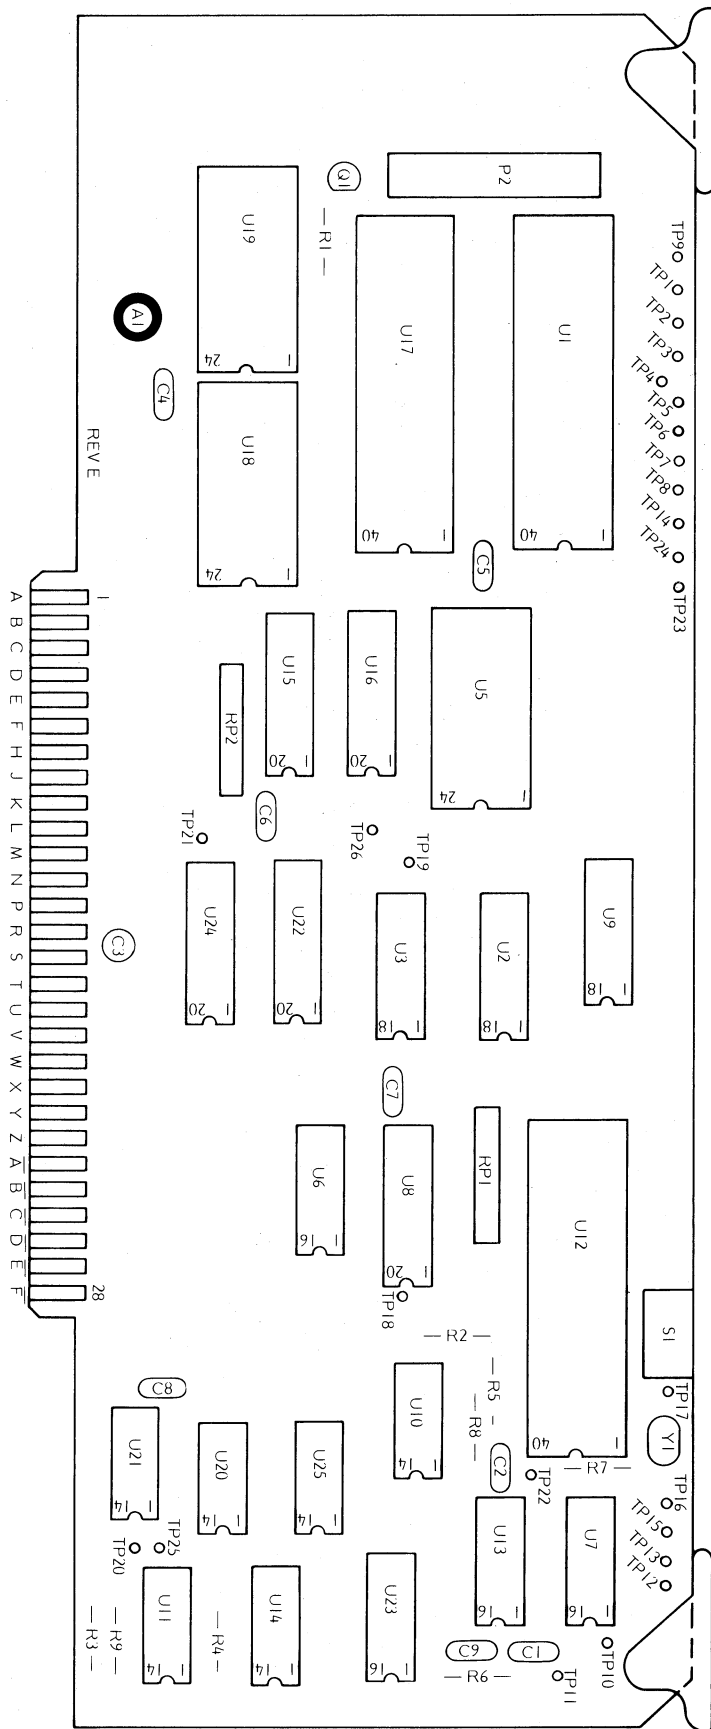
A1 GPIB Interface PCB Schematic (Sheet 2 of 3)
